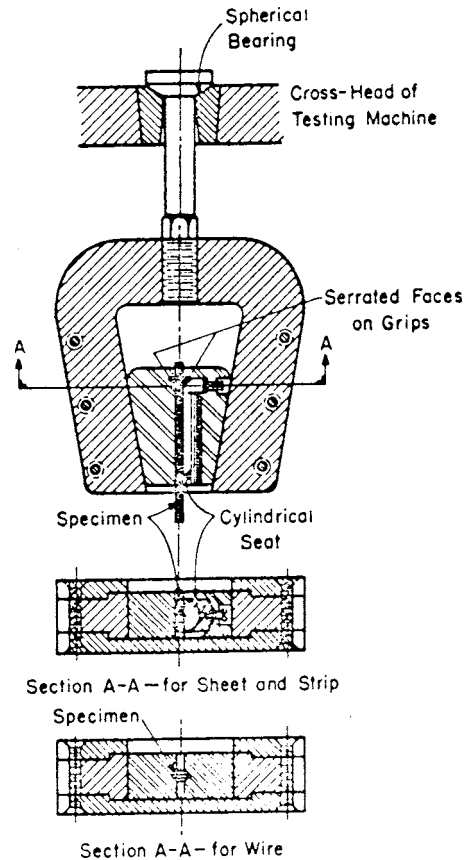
Gripping Devices for Sheet and Wire Specimens
